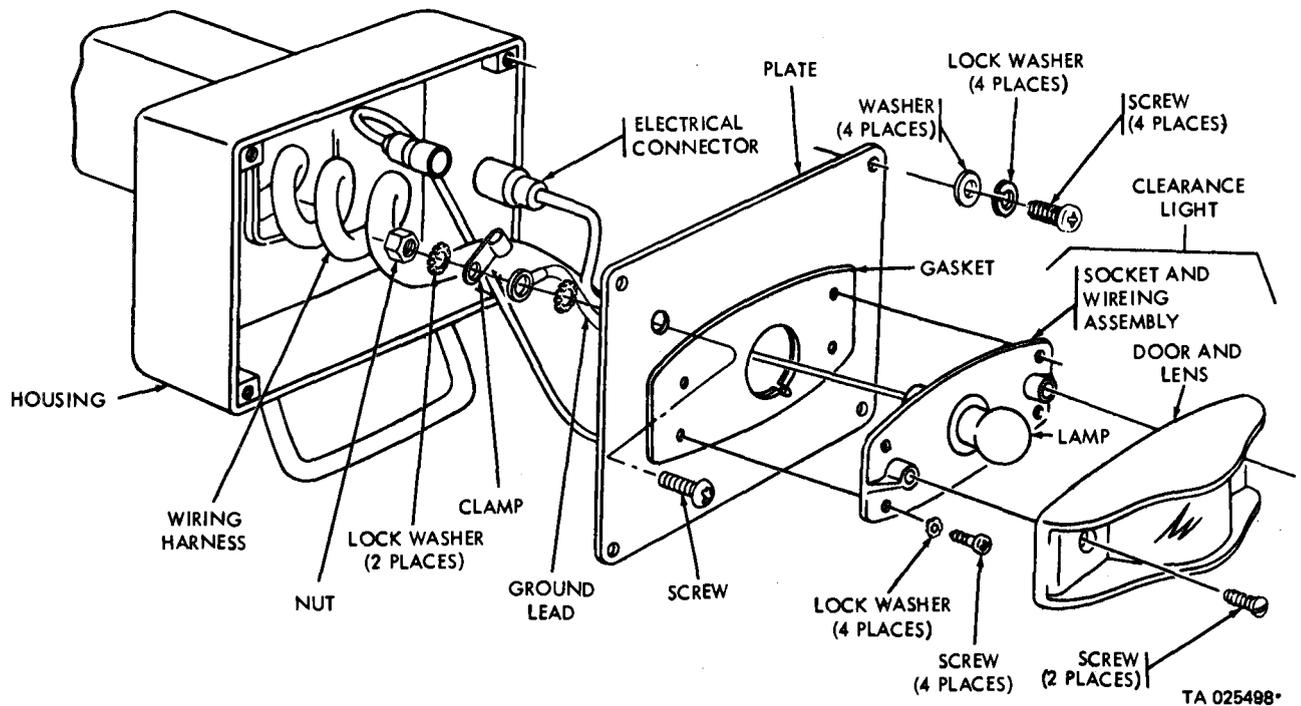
Retractable clearance light housing assembly (semitrailer No. 301 and on ).
